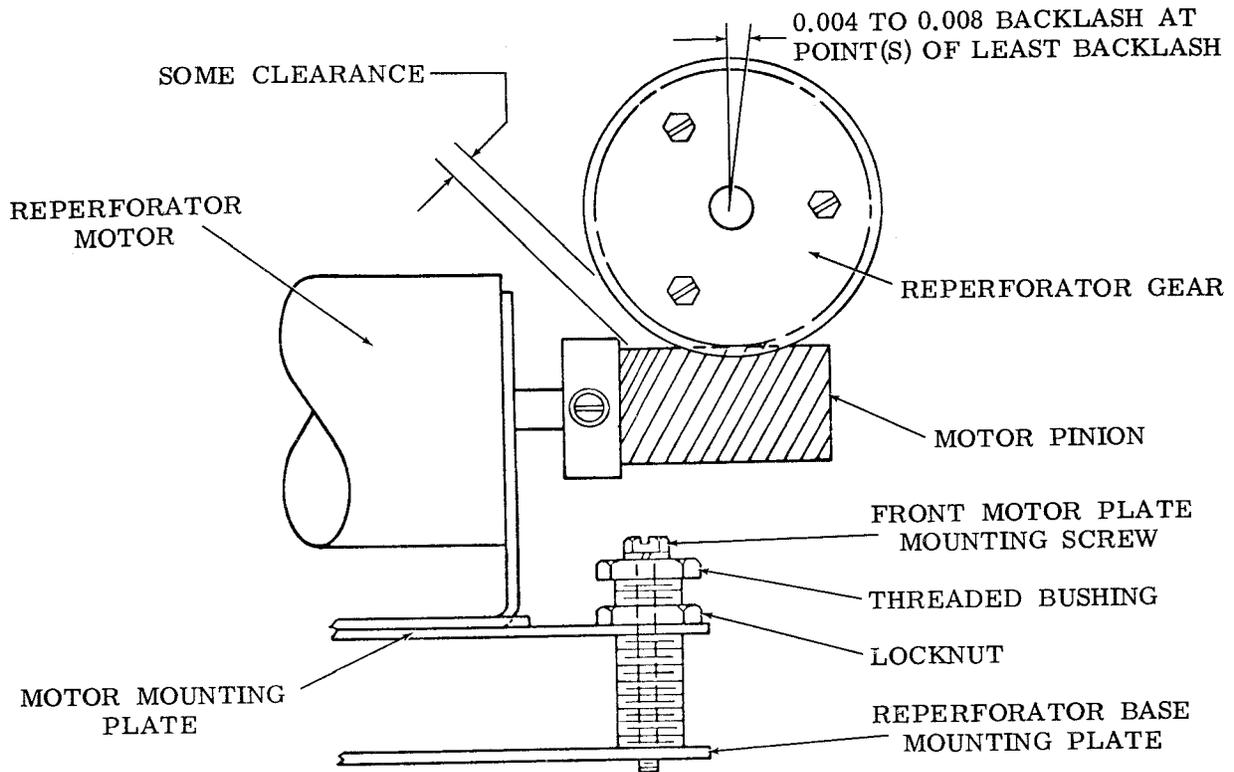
Reperforator Motor Pinion and Gear Mesh
